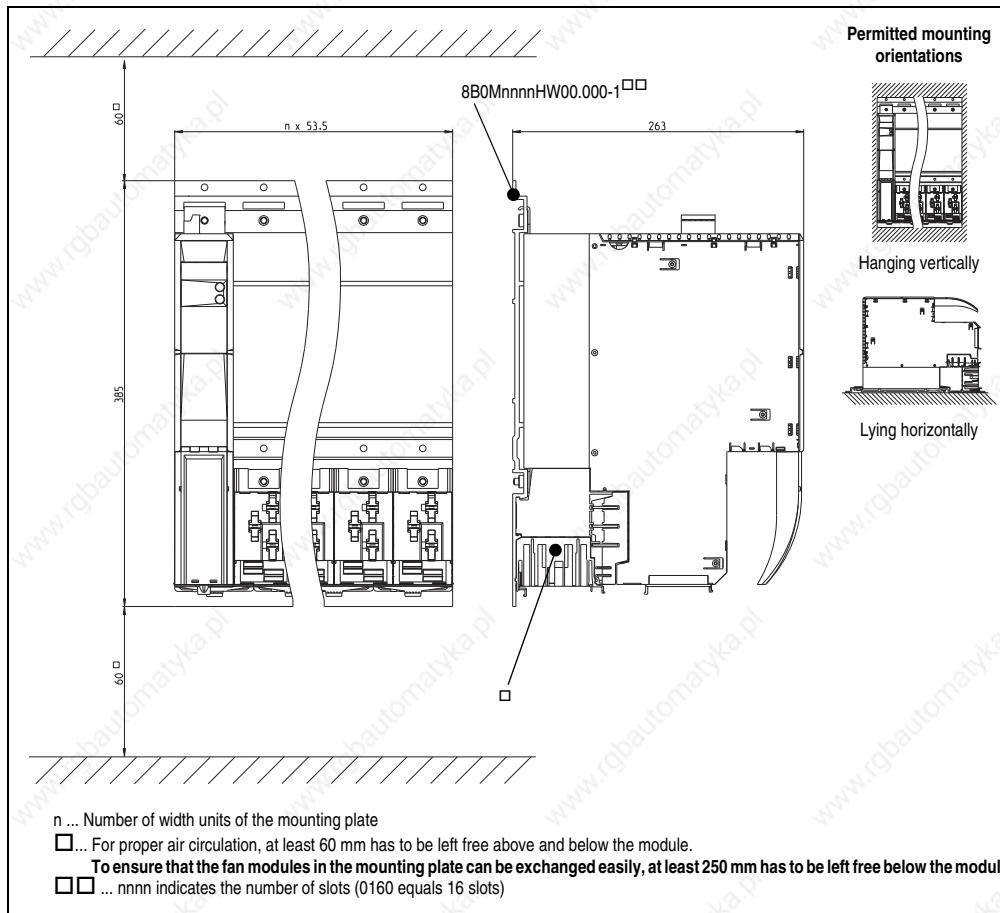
Dimension diagram and installation dimensions for 8B0C0160HW00.000-1,
